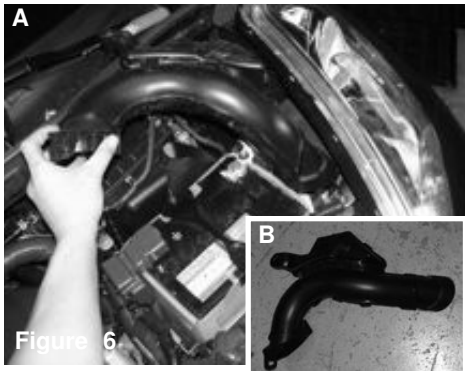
Remove the air duct from behind the driver-side headlight. Figure B: Air duct shown
